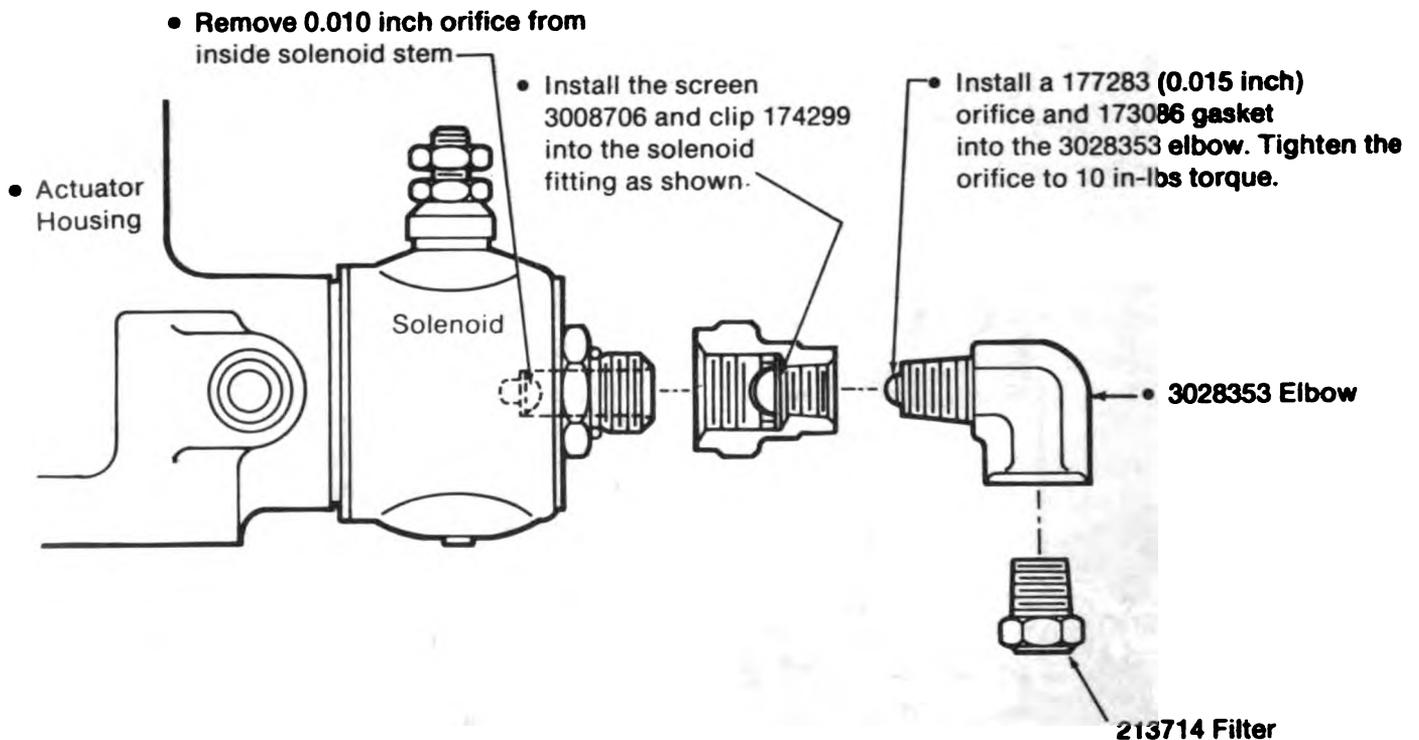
Part No. 3028355 MVT Kit (Solenoid Valve)
